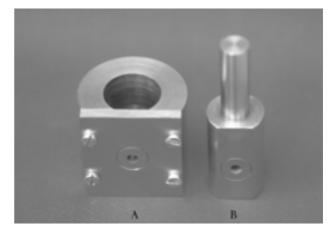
Mechanical device. A - Outer part; B - Inner part⁶.
